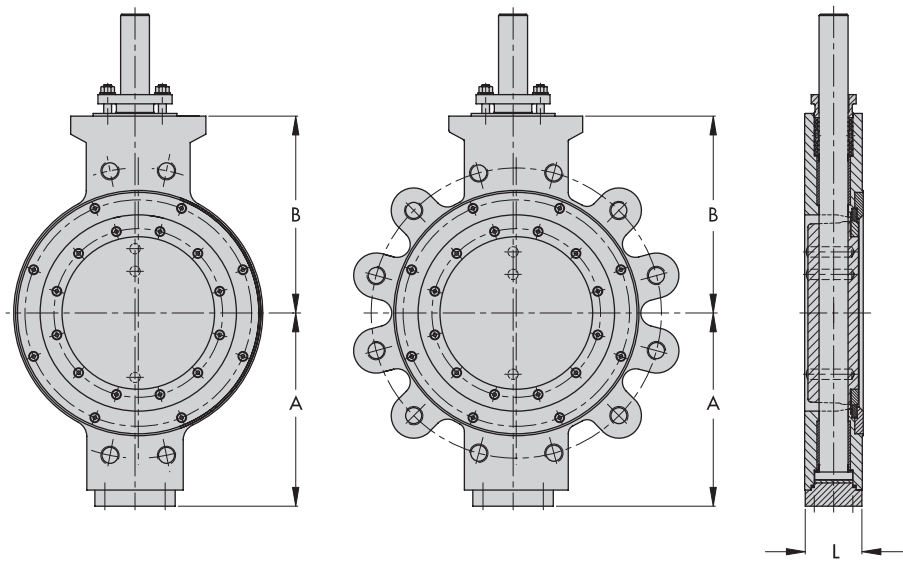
· Dimensional diagrams for wafer style body and lug type body
